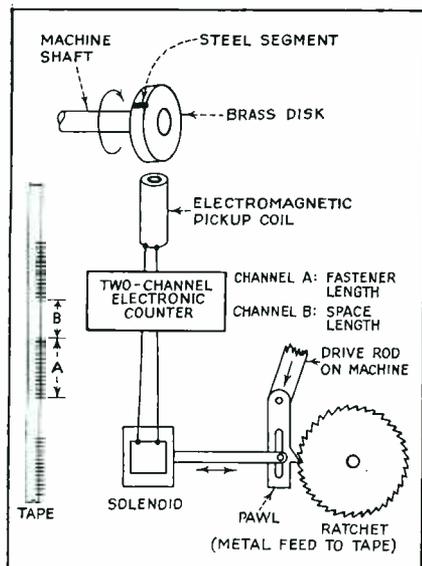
Arrangement for automatic control of slide fastener machine, using one predetermined channel to control the number of elements inserted in the fastener tape and using the second predetermined channel to control the spacing between sections on the tape
